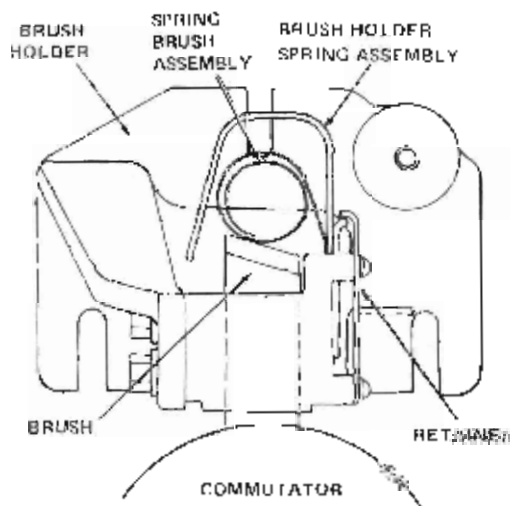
Constant-Pressure Brush Holder, DC Motors
